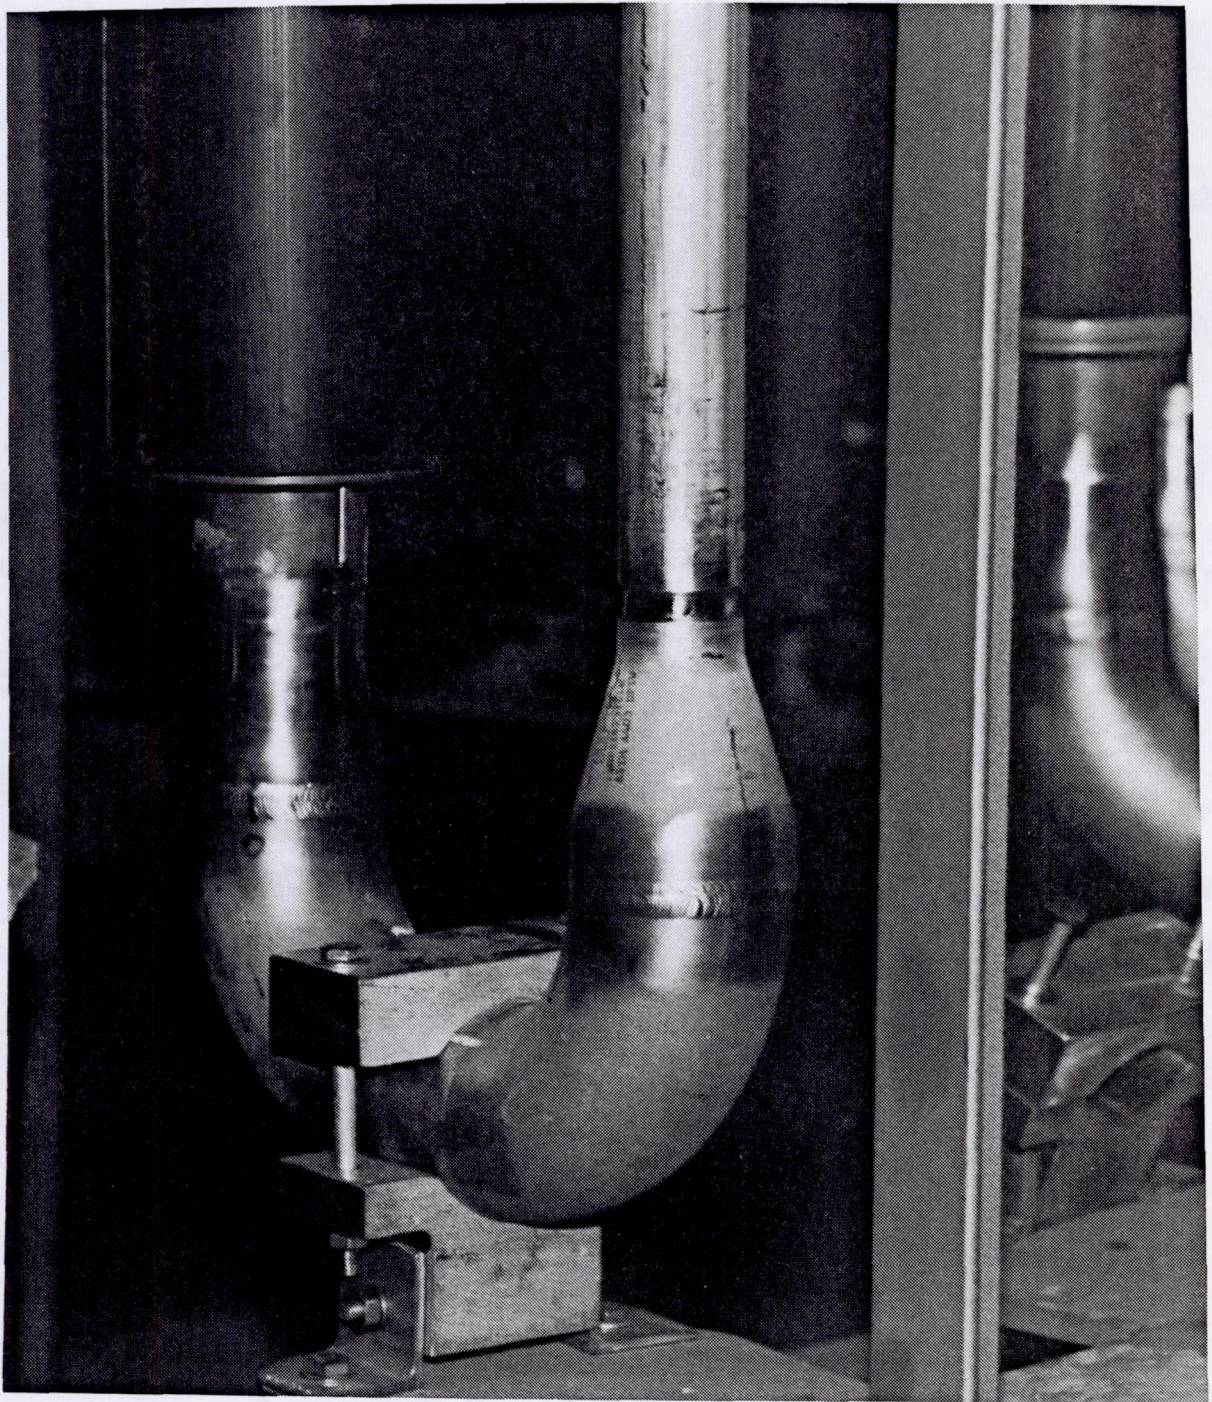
Close-up of the Front Brackets and Inlet Pipe Weld to Reducer Transition Section
